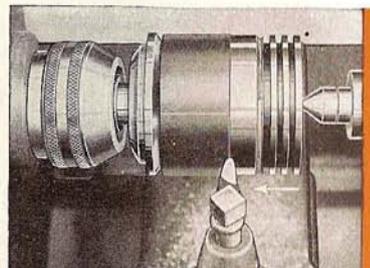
Finishing Semi-Machined Piston Mounted on the Piston Adapter.
